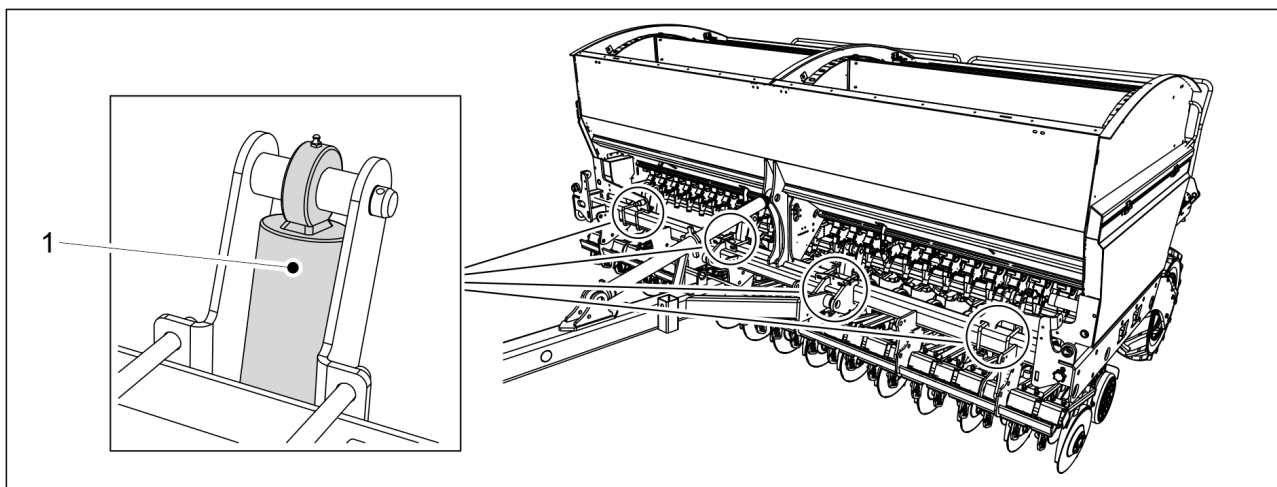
243. Lubricating the coulter pressure cylinder
